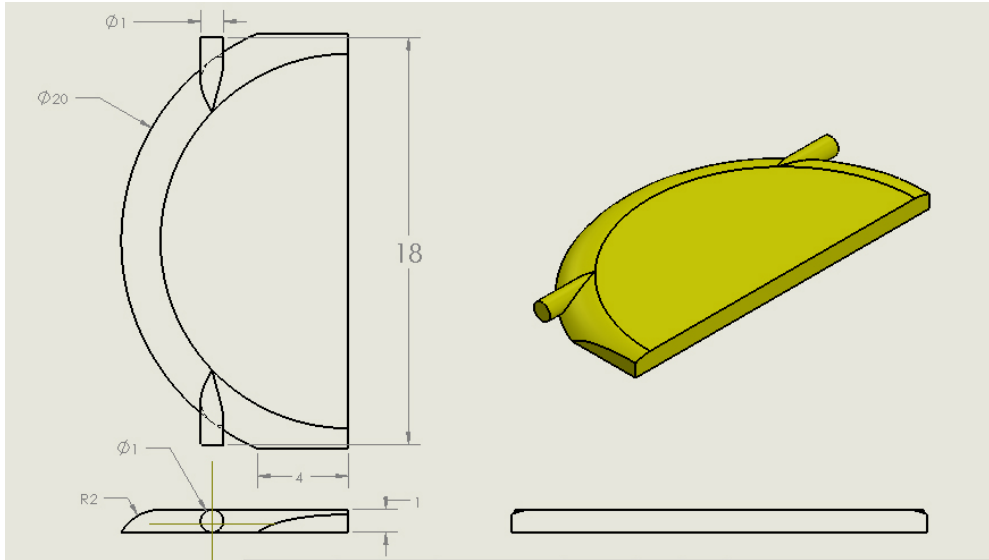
The CAD dimensional drawing of the prosthetic aortic valve leaflet
